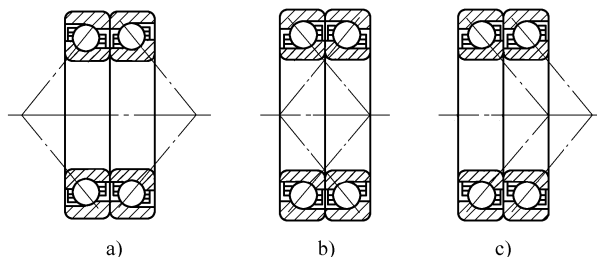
10 Pair arrangement of angular contact ball bearings
